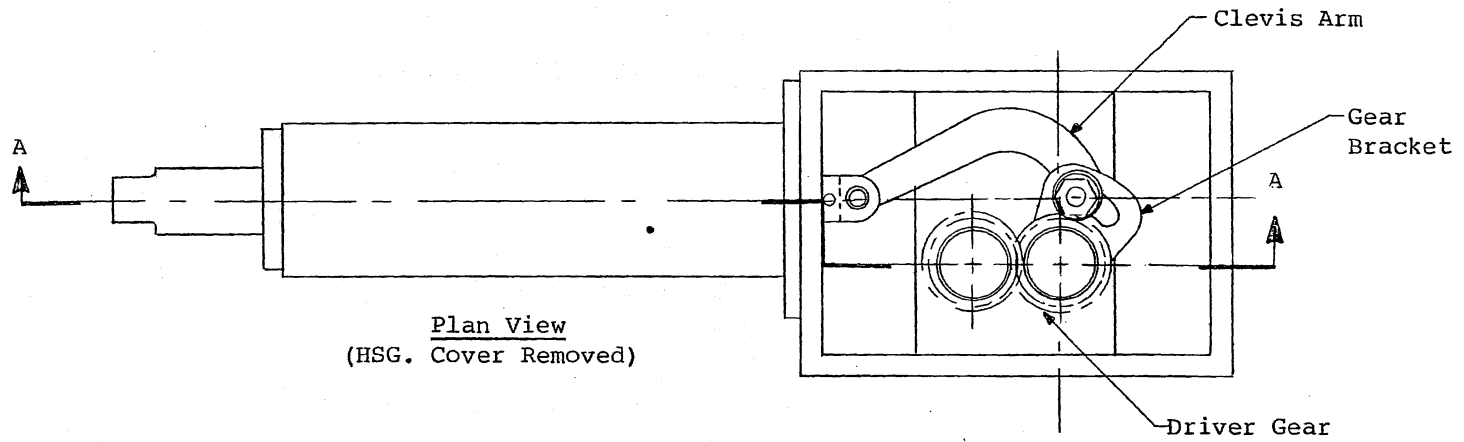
Damping Control Mechanism of the Woolley Valve Model as Finally Supplied.
